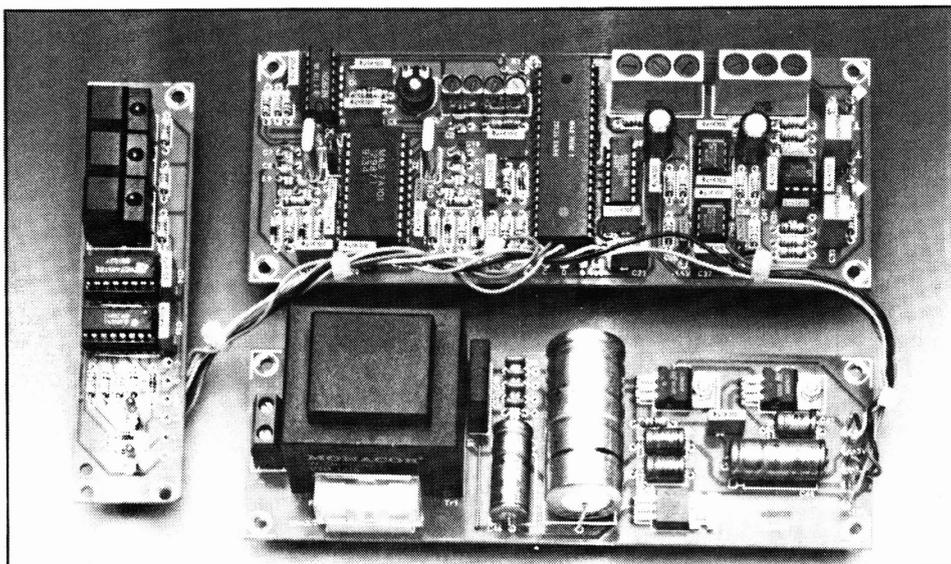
Completed printed circuit boards: main decoder board, keyboard and PSU.
